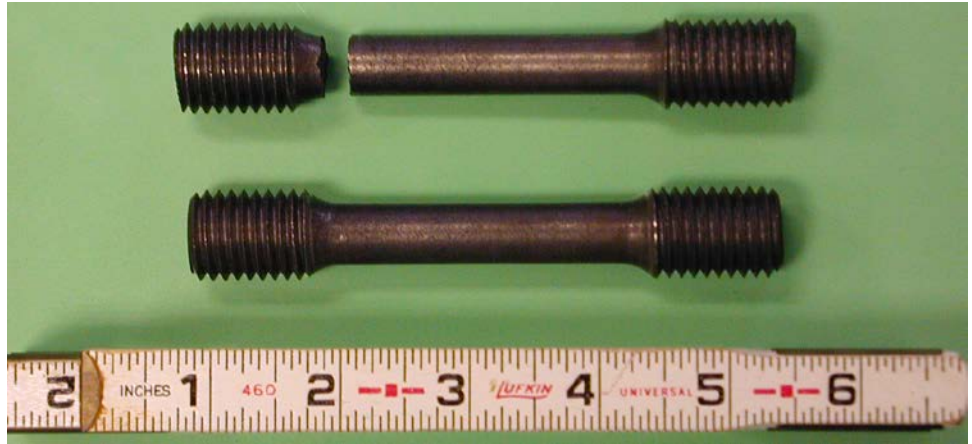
Brittle Failure of Cast Iron Specimen
